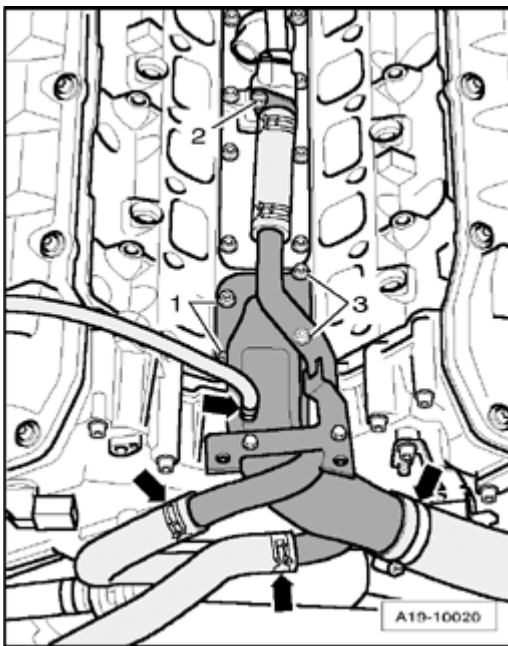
Coolant Hoses At Upper Coolant Pipe & Bolts
